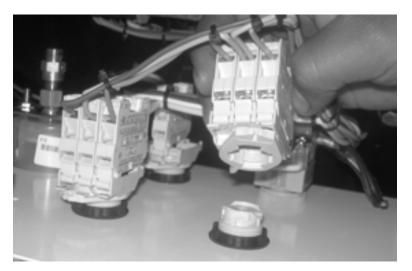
Turn the locking ring to disassemble the switch for removal.
